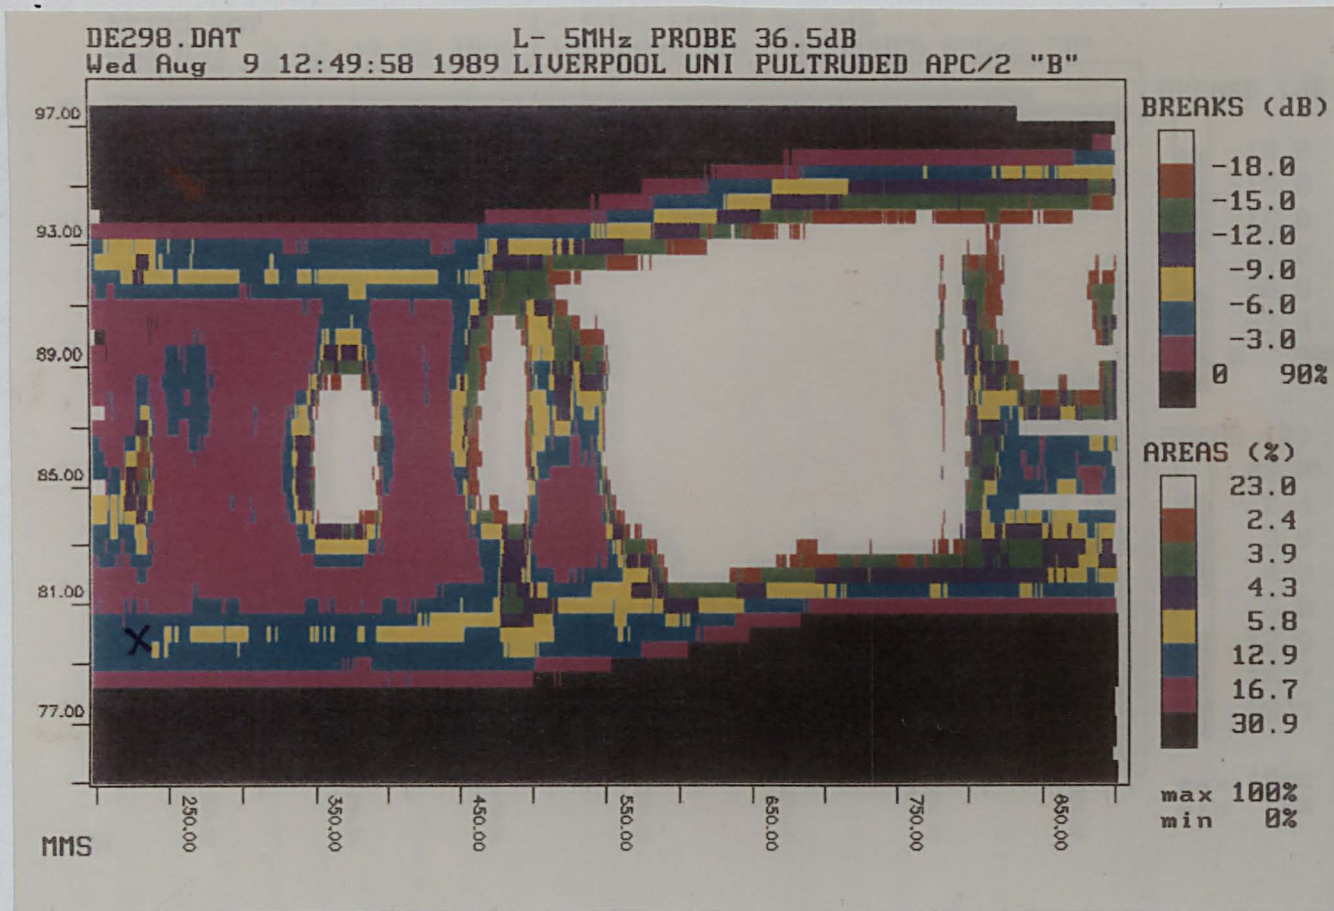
Ultrasonic C-scan of pultruded APC2 strip showing areas in which a thermocouple was formed into the section, forming large voids. Processing conditions: Line speed 1m/min; Oven temperature 380°C; Roll pressure 90N/mm.
